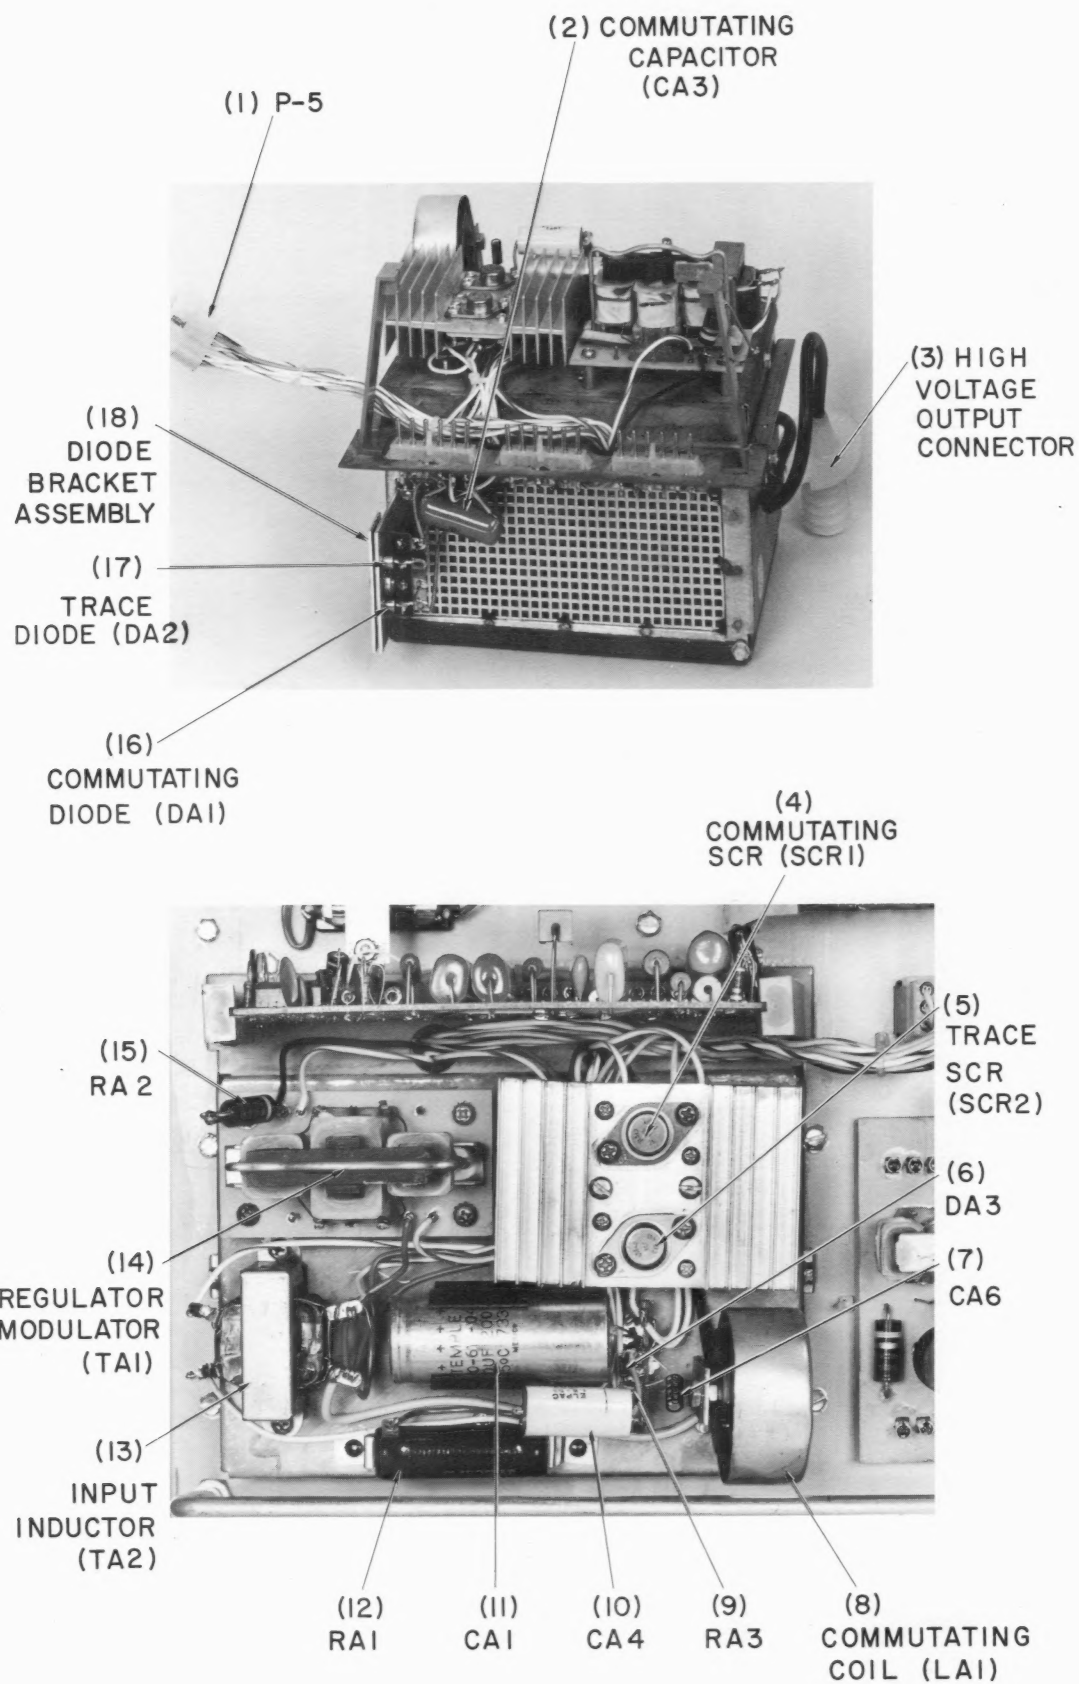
HIGH VOLTAGE CAGE AND COVER ASSEMBLY
